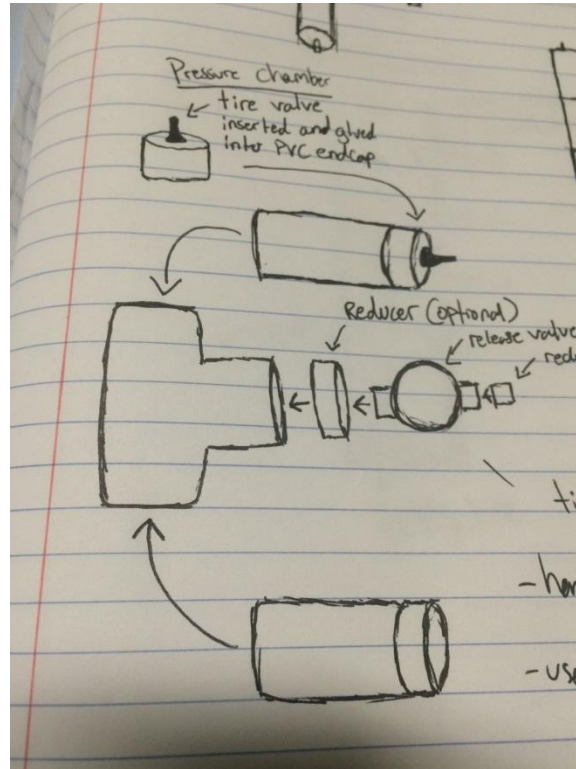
The pressure chamber is made to have two sealed dead ends in both of the parallel inlets with another endcap with a one way valve sealed in the center in the perpendicular outlet. (Photo by Tyler Caseltine)
